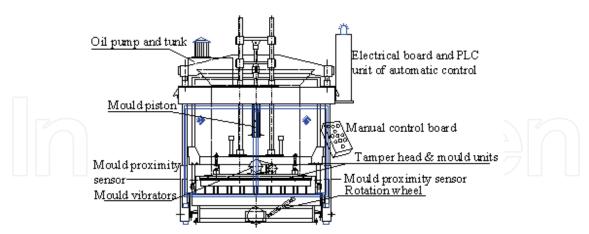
Schematic representation of the autonomous mobile press machine (RoboPress)
